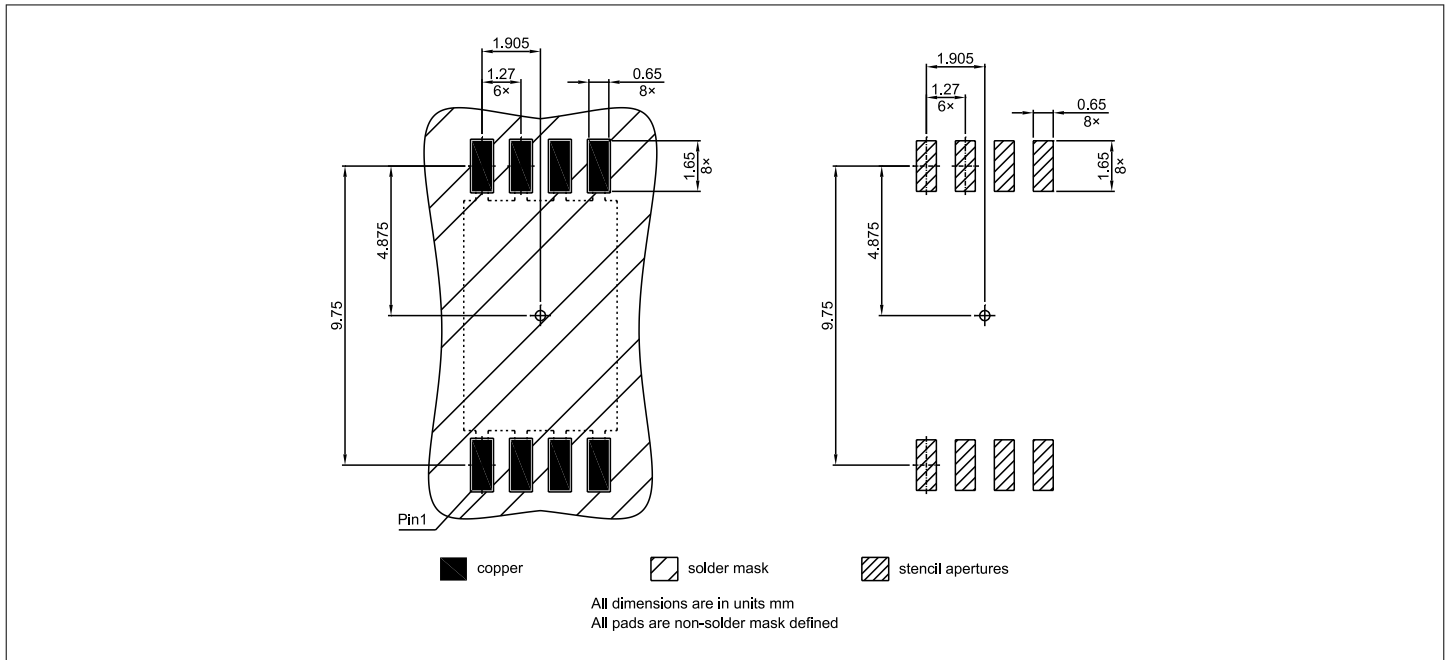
PG-LDSO-8 (300 mil) recommended footprint
